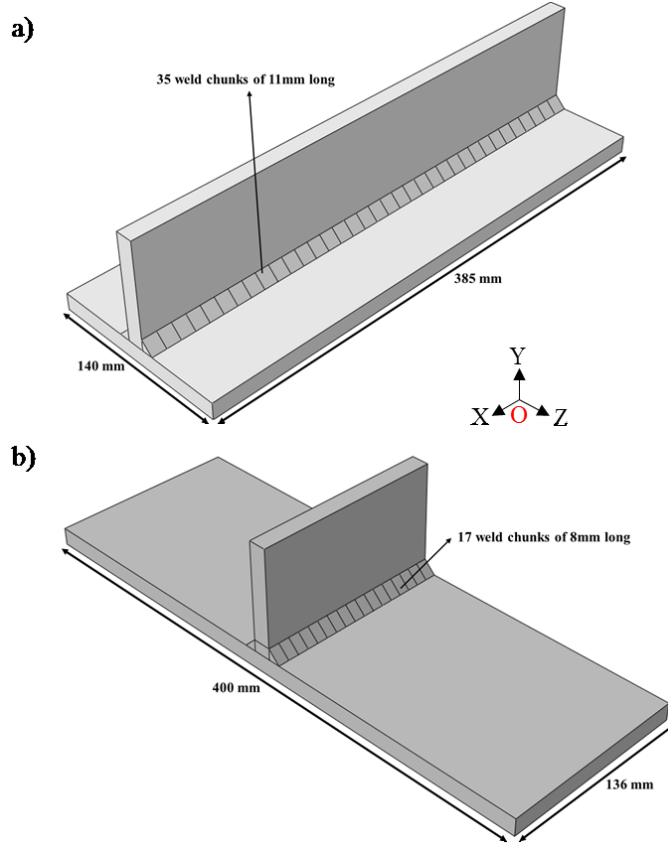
Fillet weld model geometry used in weld simulations: a) Fillet welded plate with the long weld and, b) fillet welded plate with the short weld.
